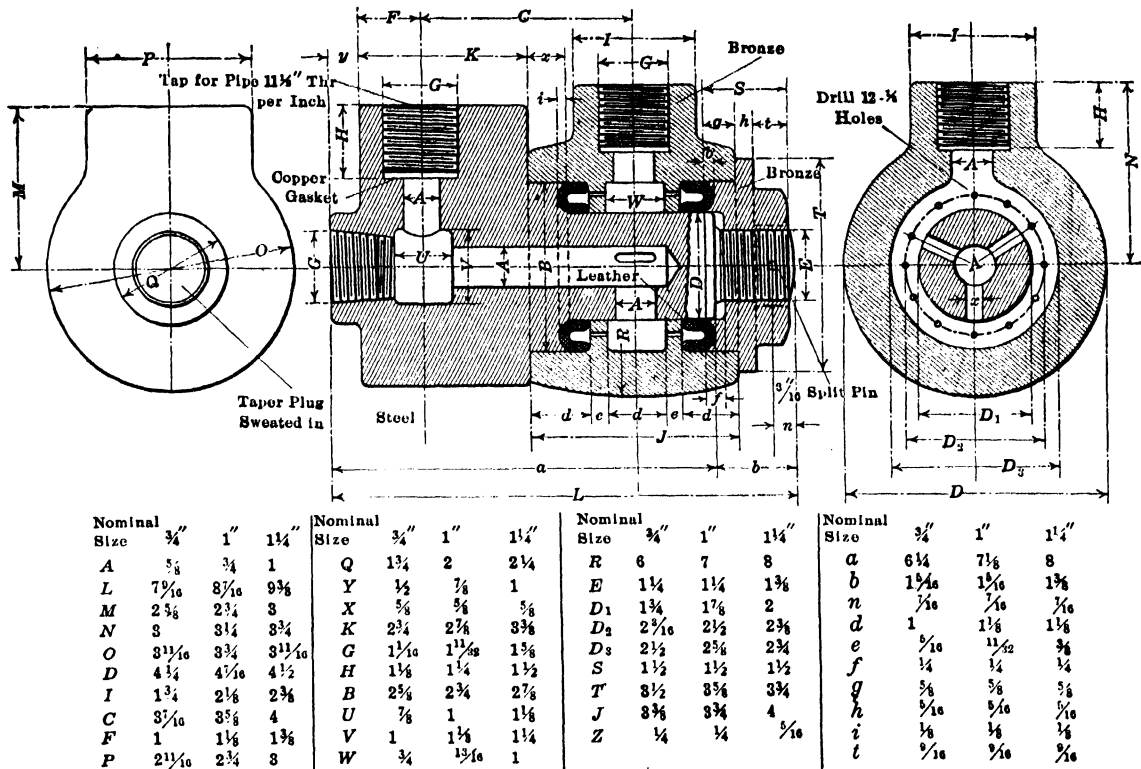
Dimensions of swivel pipe joints for high-pressure hydraulic service.
